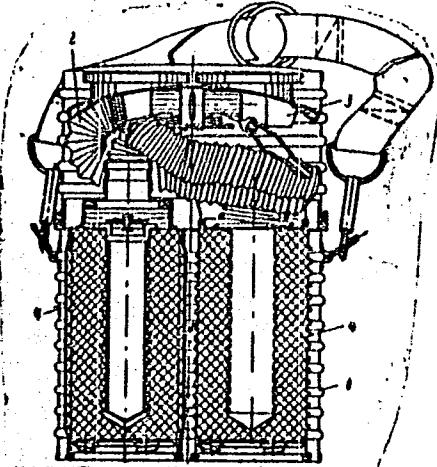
1- breathing box; 2- corrugated hose; 3- mouthpiece;
